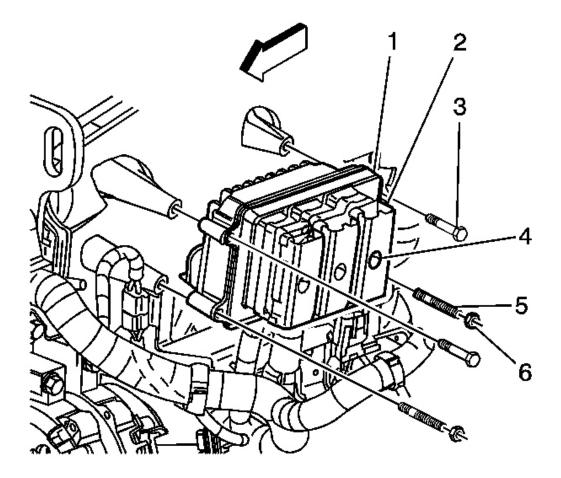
View Of PCM Assembly Courtesy of GENERAL MOTORS CORP.
